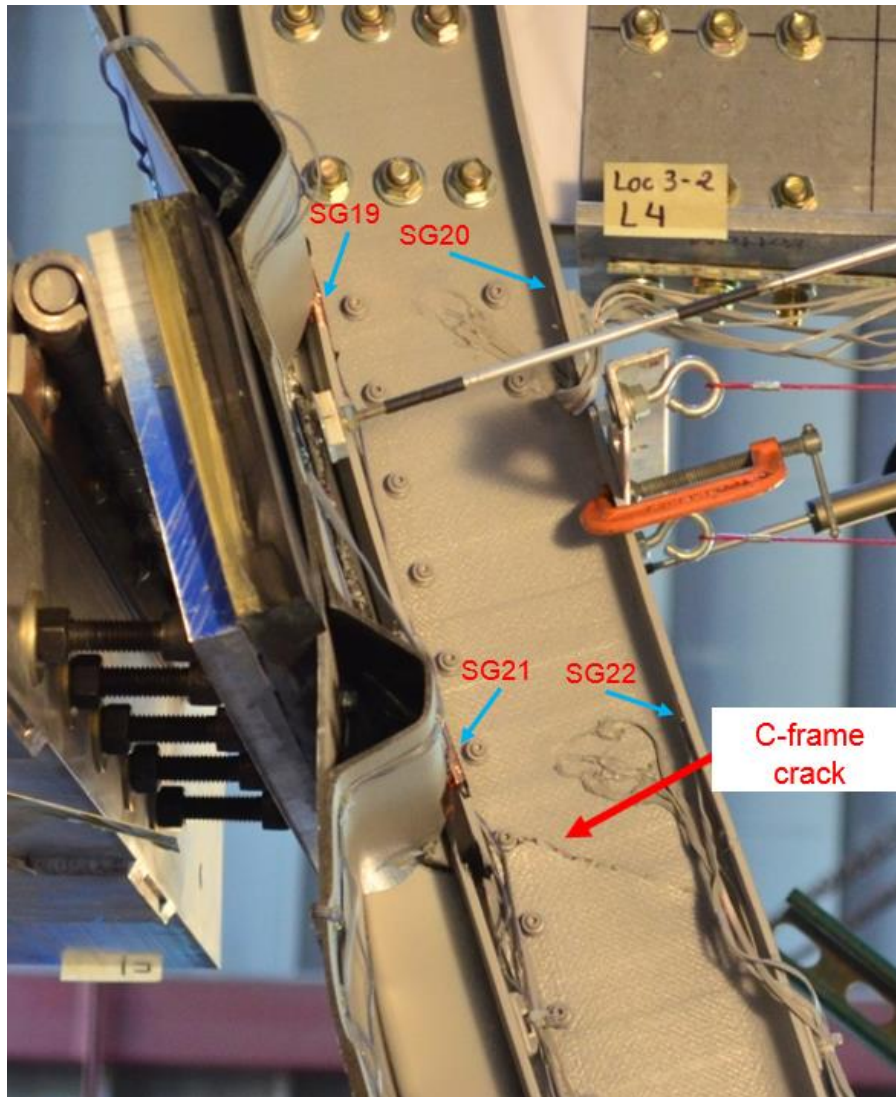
Second fracture on shear tie web due to buckling by eccentric compressive load during Loc3-2\_L4 test.
